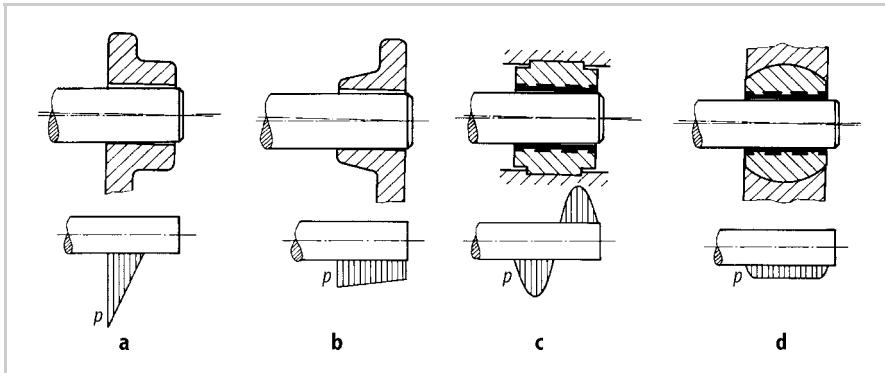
Force transmission in bearings: a edge compressing because of insufficient adaptation of the bearing to the deformed shaft; b more even bearing pressure because of matched deformations; c lacking adjustment to shaft deformation; d more even bearing pressure because of adaptability of bearing bush
